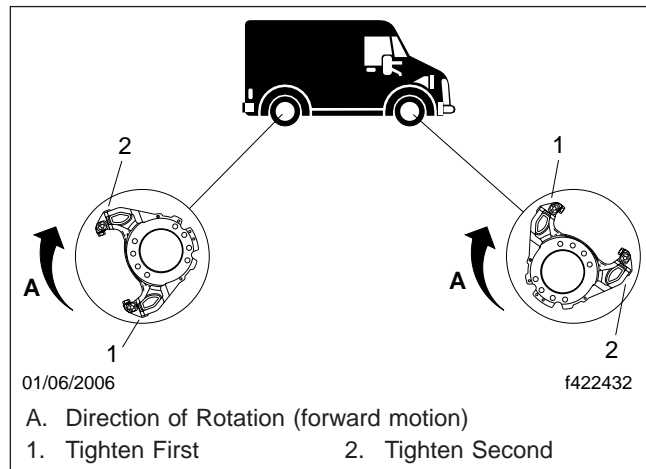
, Tightening Sequence for Caliper Mounting Bolts, Right Side
